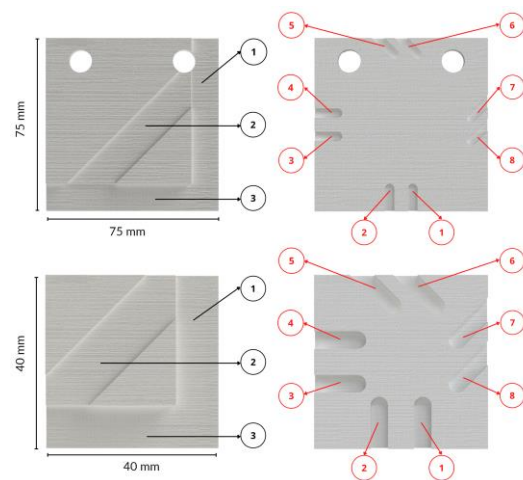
Top and bottom surface of CAD models of composite and their grinding directions.
